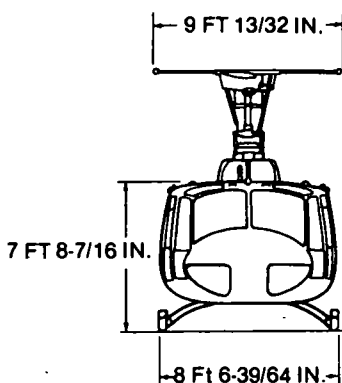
Principal Dimensions, UH-1D and H (Iroquois)
